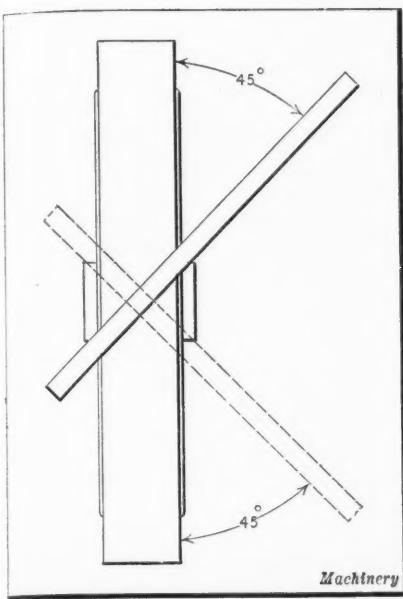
Method of pounding Polishing Wheel Face to soften the Cushion
